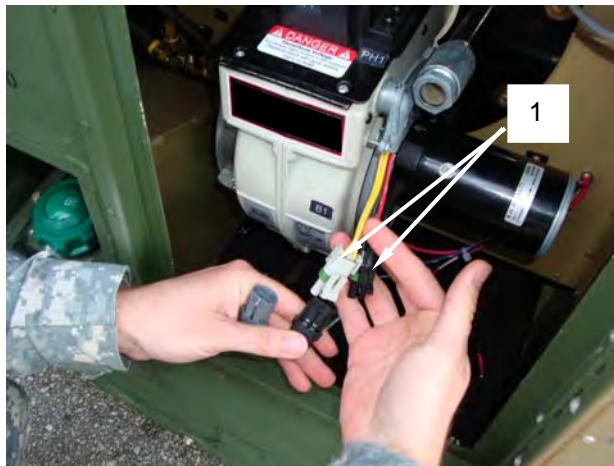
Disconnecting Electrical Connectors from Burner Assembly.
